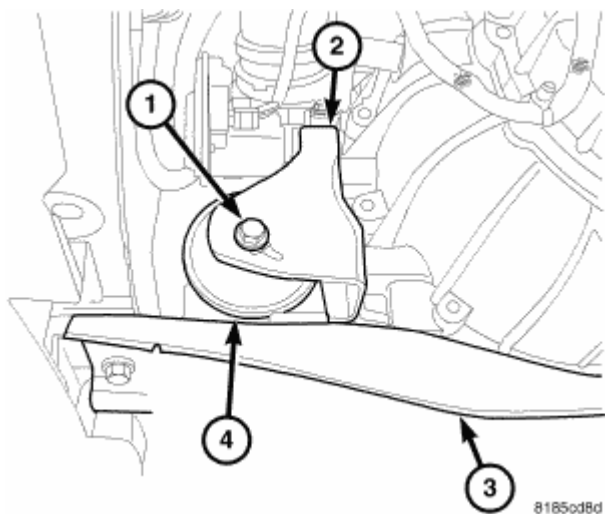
FRONT MOUNT THROUGH BOLT
